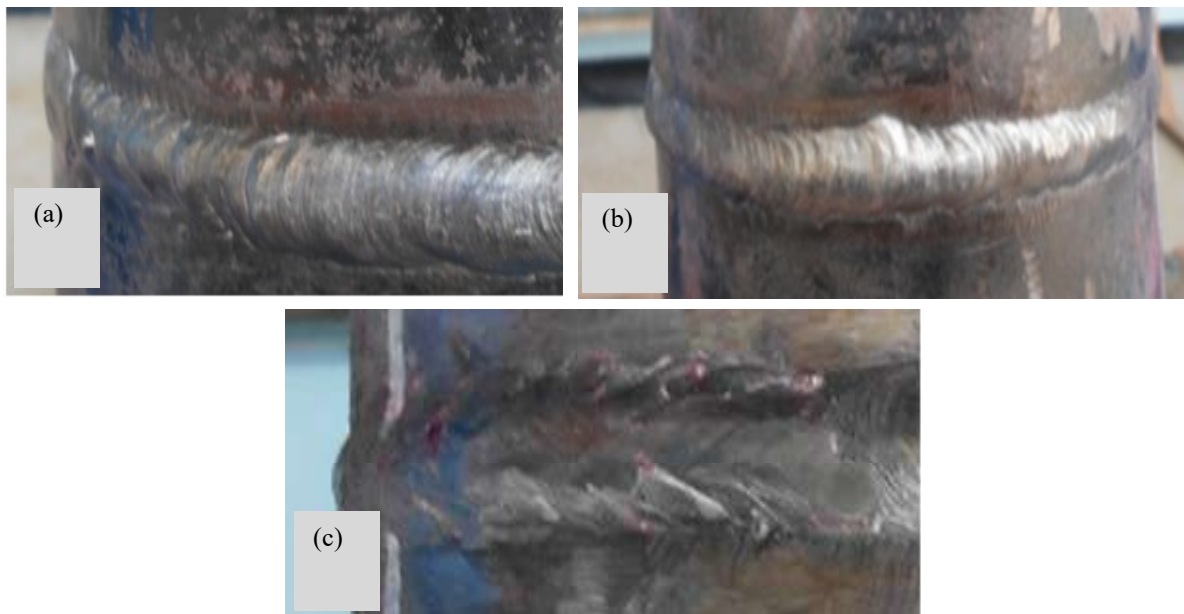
Welding results, a) 50A, b) 80A, and c) 140A
